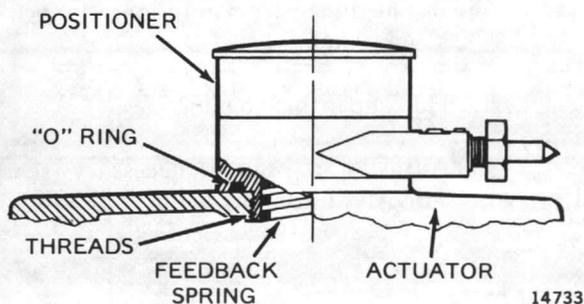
Old-Style MP953A and B Positioner (Gradutrol Relay).
